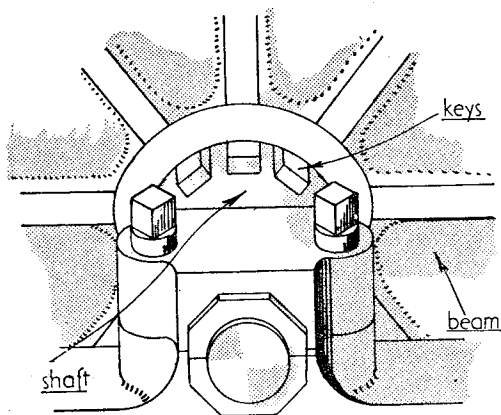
Illustrating the manner in which the beam is staked on to the shaft
